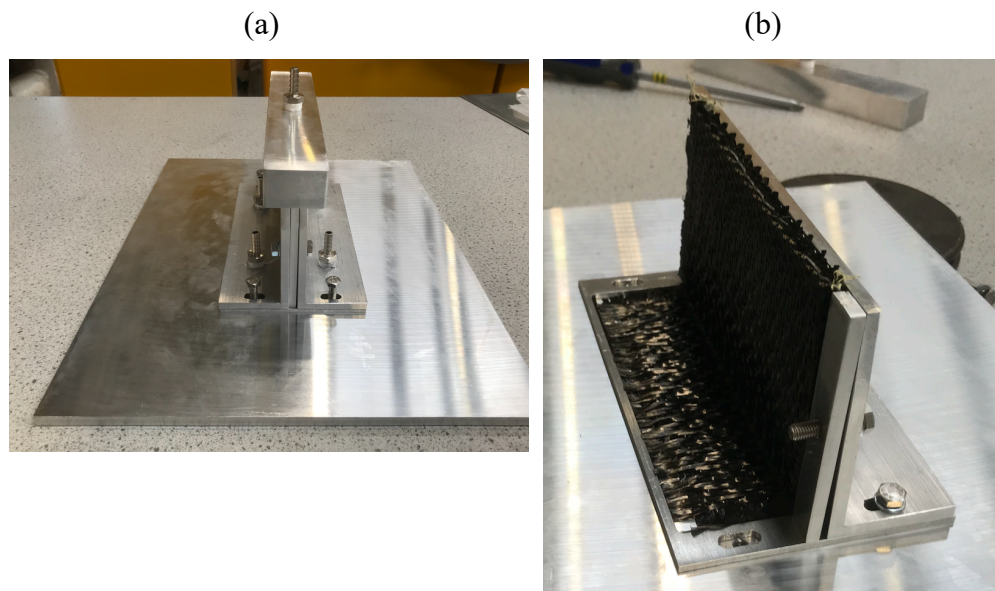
Aluminium mould tool for RTM. (a) Mould tool as assembled. (b) Mould tool with the cap and corner piece removed, illustrating how the woven preform sits inside inside.
